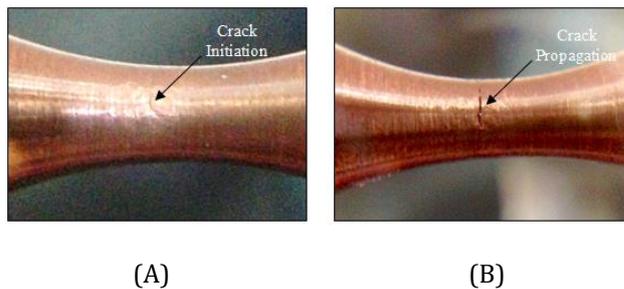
A- Crack initiation in case (Reversed bending fatigue), B- Crack evolution in case (Reversed bending fatigue)
